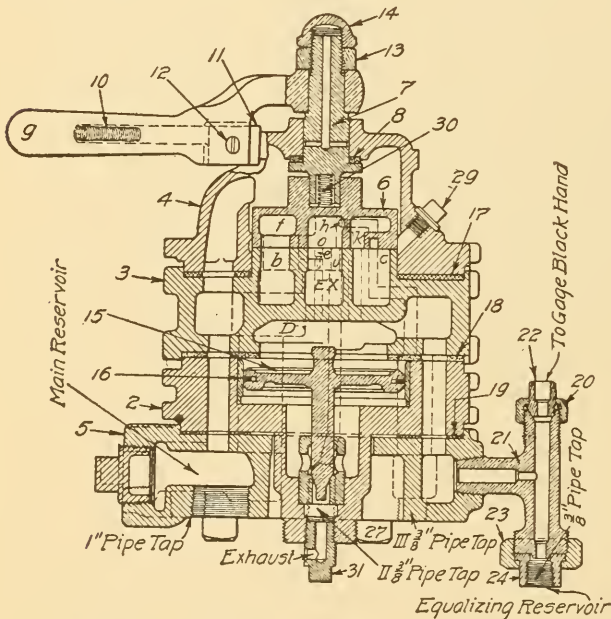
Plan and Sectional Elevation of Westinghouse "H-6" Automatic Brake Valve
